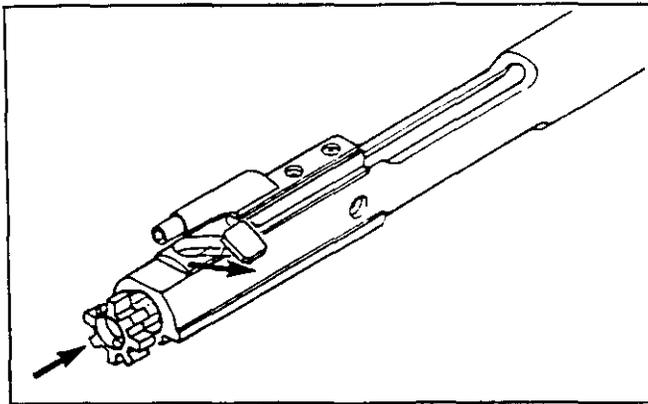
BOLT CARRIER DISASSEMBLY (CONT)
